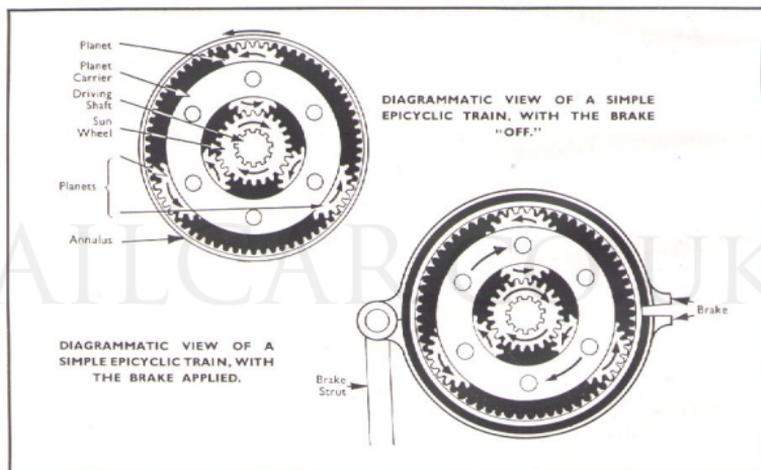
Diagrammatic View of Epicyclic Gear Train.
